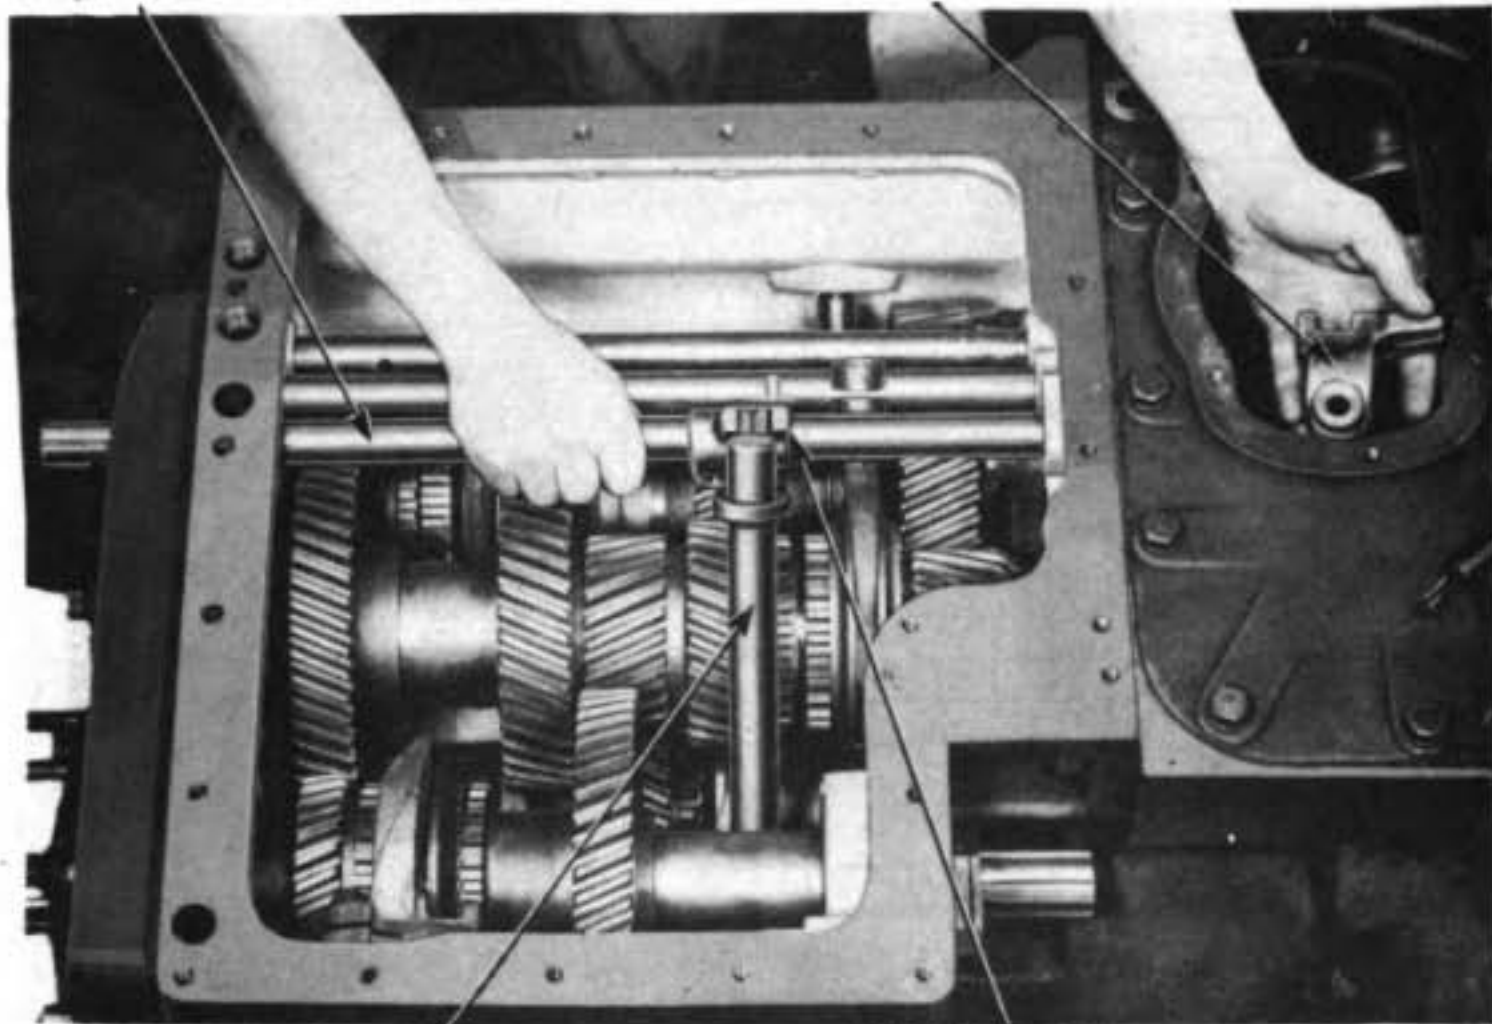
Removing Gearshift Lever Swivel Housing Assembly
